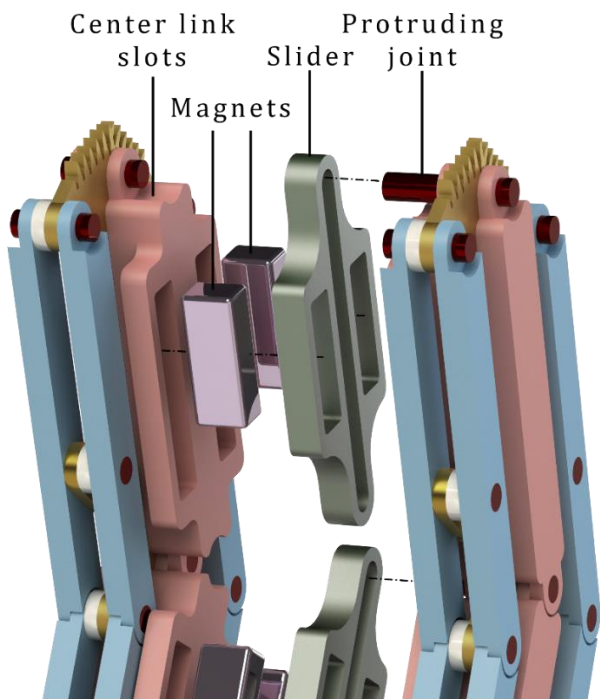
Exploded view sliding mechanism with its parts labelled. Render made in SolidWorks [55].
